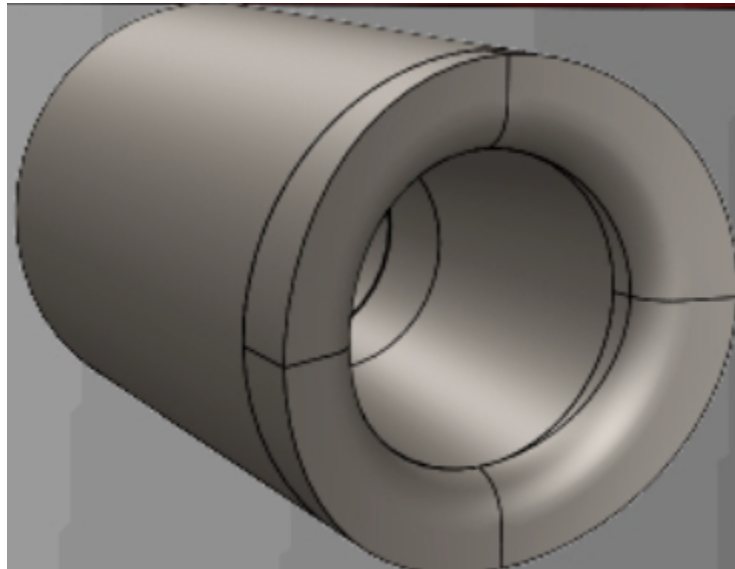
CAD drawing of the nozzle provided by Electricite de France
